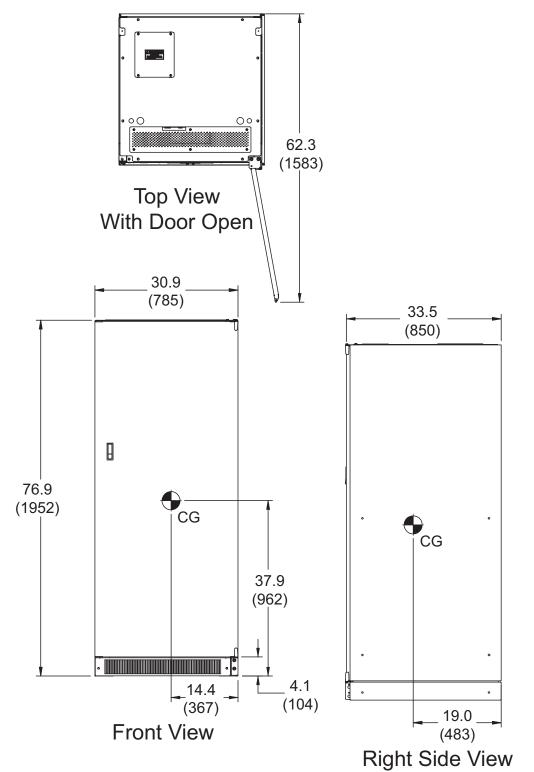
Outline drawing, 250-400kVA, Liebert Module Battery Disconnect
